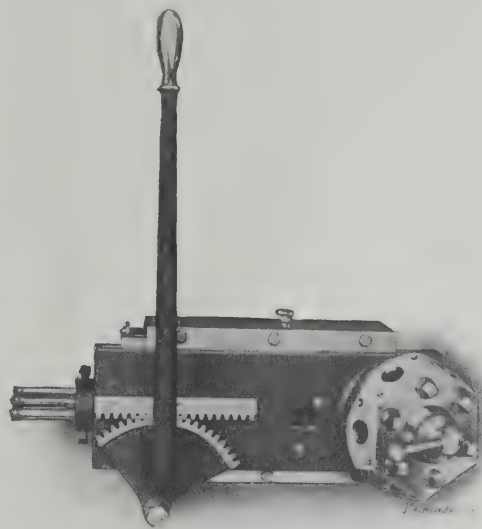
Lever Feed of No. 1 Tilted Turret Screw Machine
